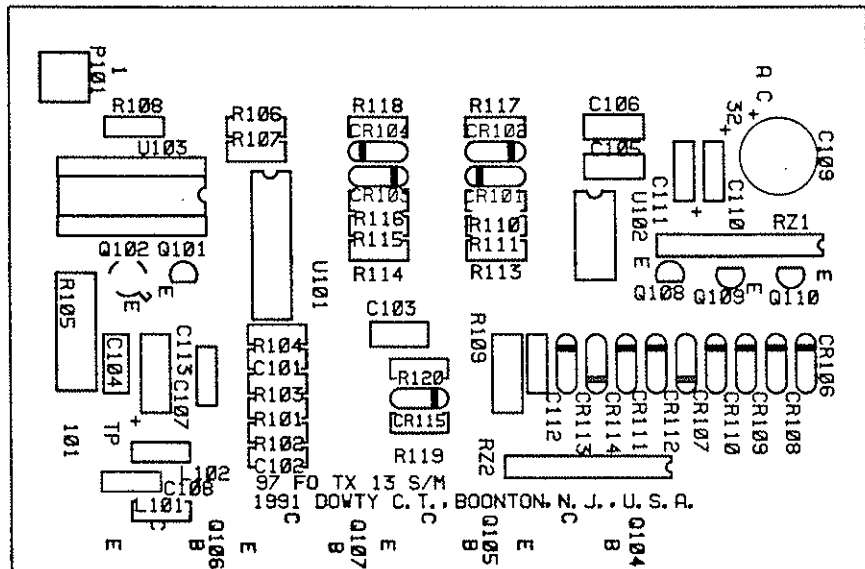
Component locator drawing, 1300-nm LED fiber optic emitter heads
